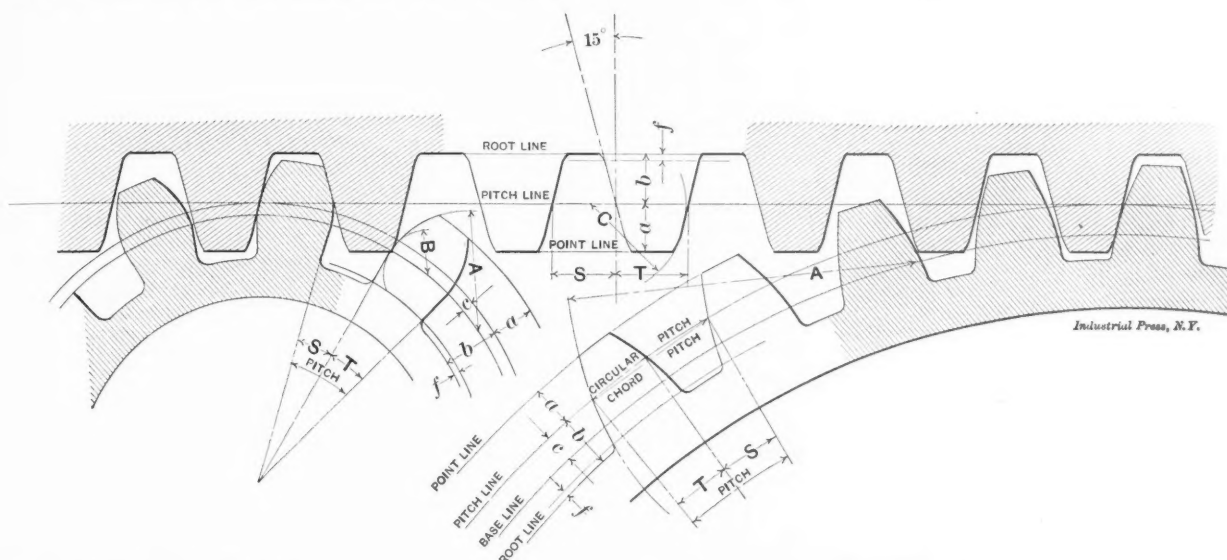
Two Gears in Mesh with a Rack. The Gear on the left shows the Method of Laying Out a Gear having twelve to thirty-six Teeth; that on the right, a Gear of thirty-six Teeth or more.
